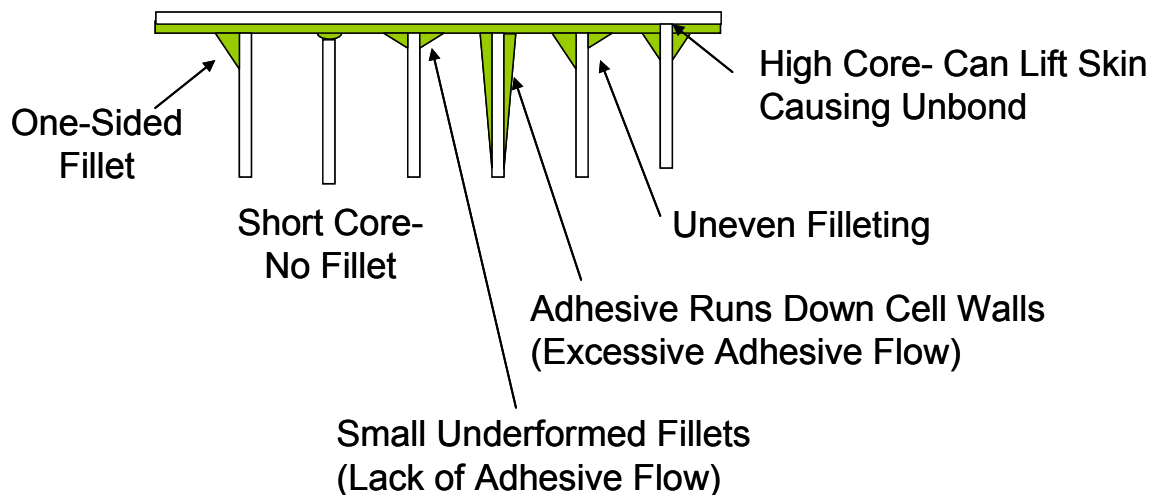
(a) *Adhesive bond fillet on honeycomb core.
